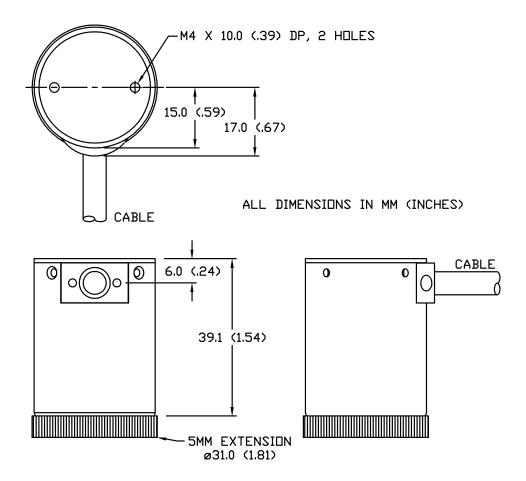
Dimensions, In-Sight 4100 Remote Head Camera
